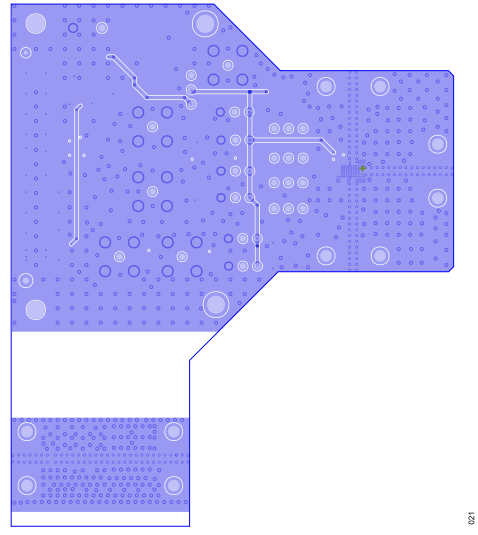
EVAL-ADGM1001SDZ Component Side Ground Plane PCB Drawing (Layer 3)
